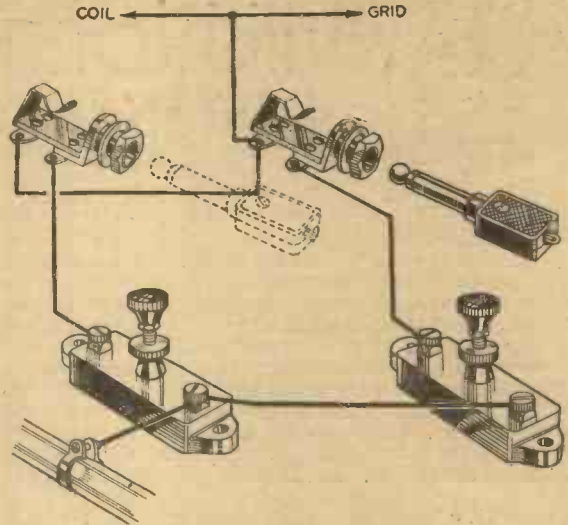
Using jacks and a plug instead of switches. This scheme may be used to prevent unauthorised use of the set.
